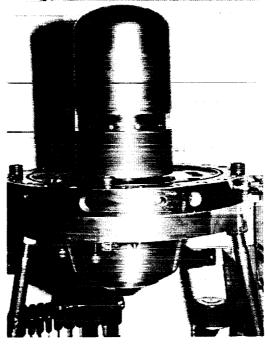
Completed SPDE Displacer Drive Assembly on Assembly Stand
